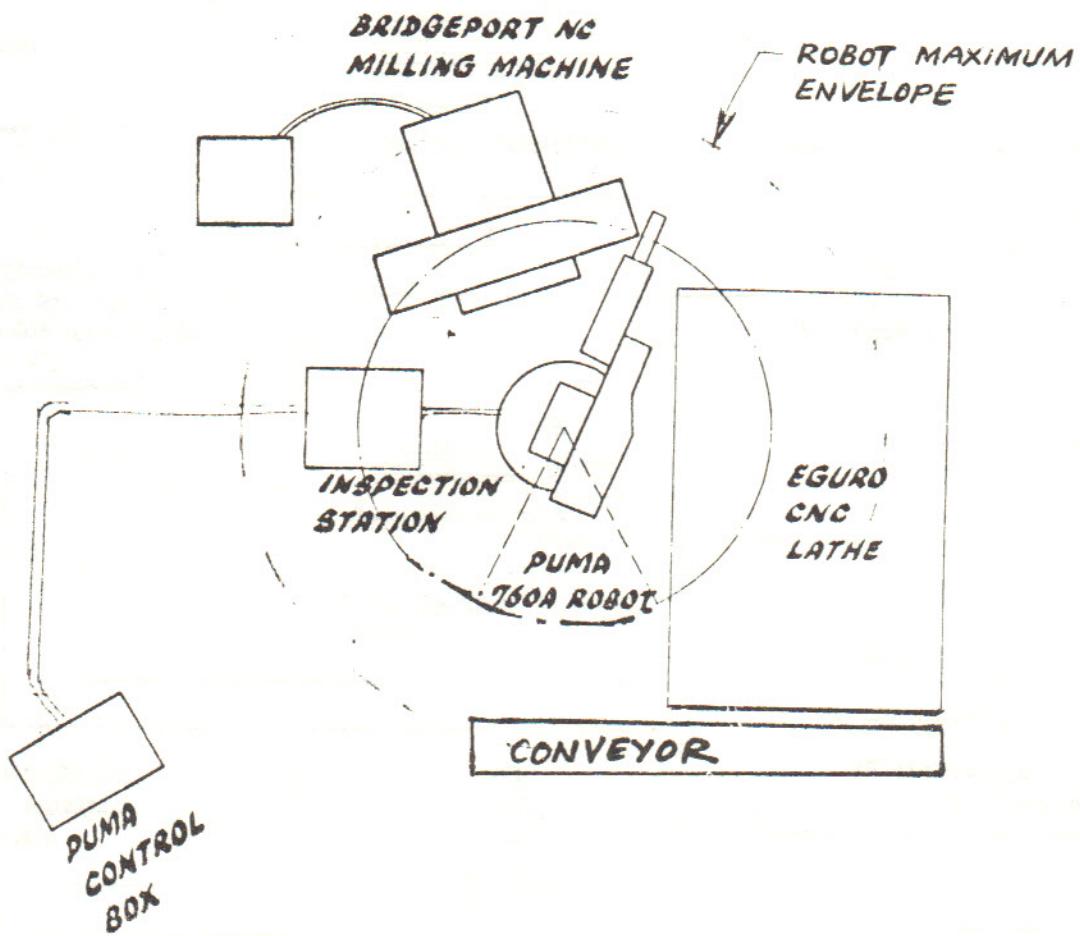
LAYOUT OF FLEXIBLE MANUFACTURING CELL
